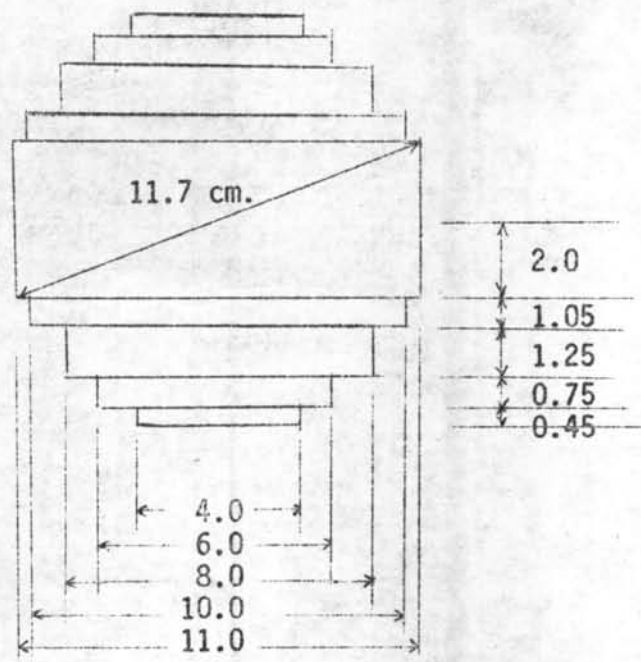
CORE-LEG CROSS SECTION, DIMENSIONS IN CM.
